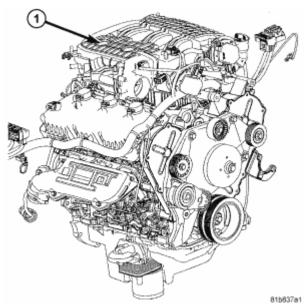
4.0L ENGINE Courtesy of CHRYSLER LLC
